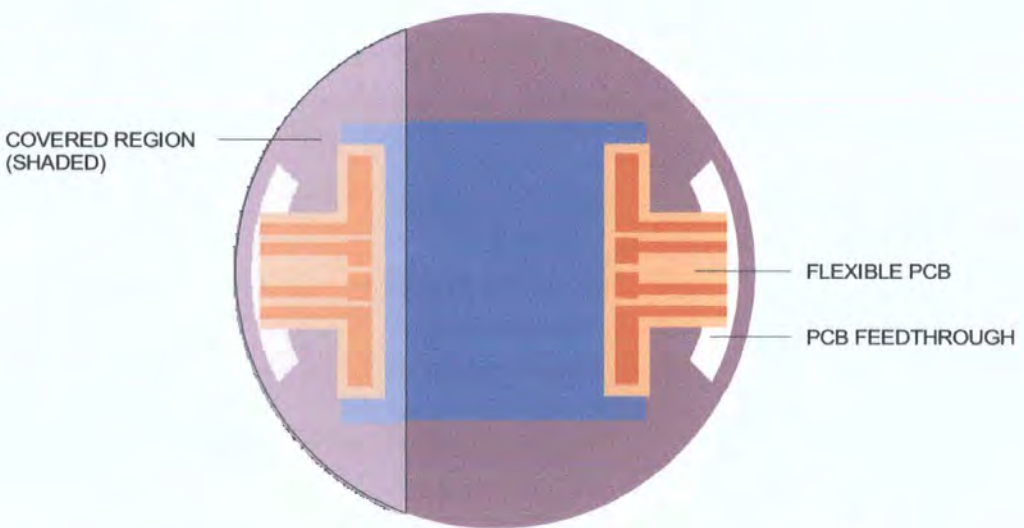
Plan view of package. The right side is shown at sensor surface level and the shading on the left shows the raised protective region. The PCBs become narrower for the lead-outs.
